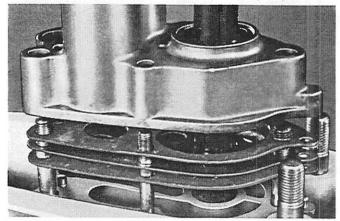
Merc 700-800 Water Pump Gaskets Master Service Manual Section III - Lower Unit
